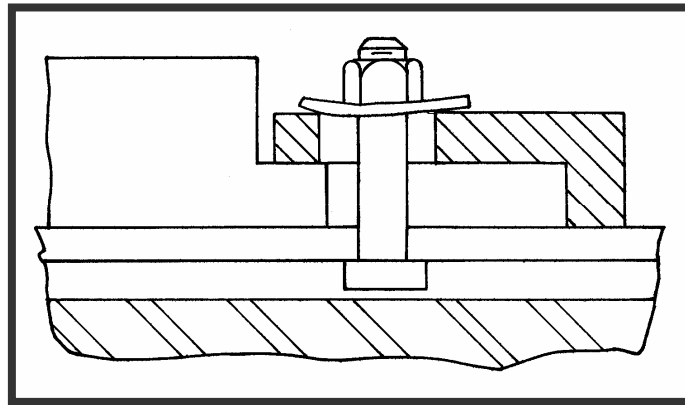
The hole in a good toe-clamp should only be slightly larger than the bolt. A thin washer will deform and allow the clamp to loosen if the hole is too large. This style clamp is suited for light duty short run work. *Smith & Associates
